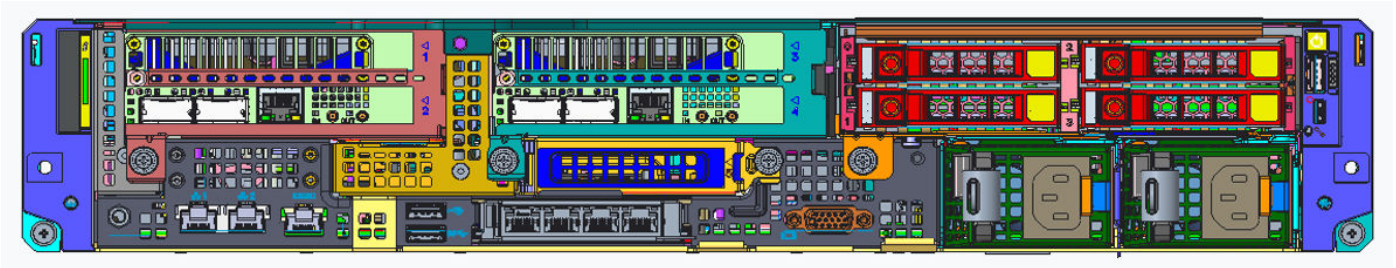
XR7620 Front accessed FHFL 4 x 2.5 chassis
